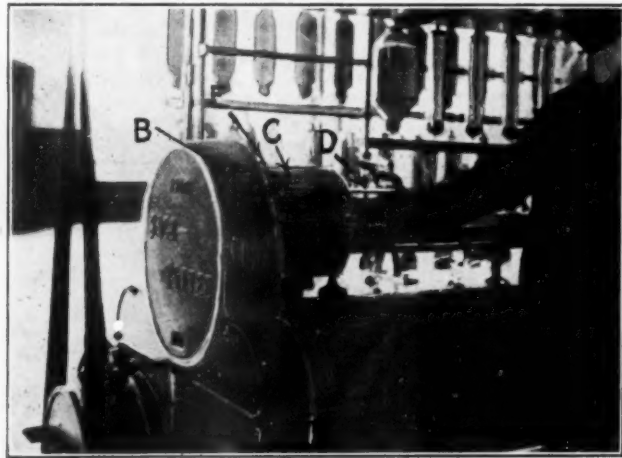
INTERLOCKING GUARD FOR DRAFT GEARS OF ROVING FRAME
